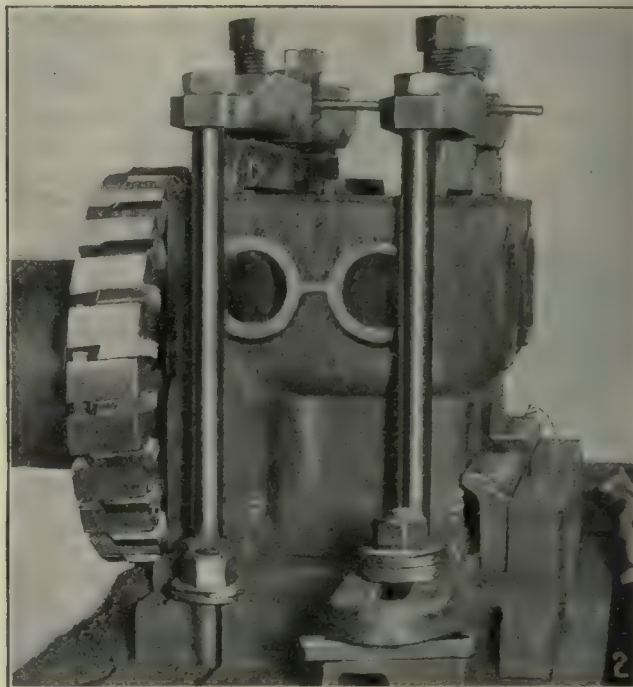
MILLING THE SIDES OF THE CYLINDER
